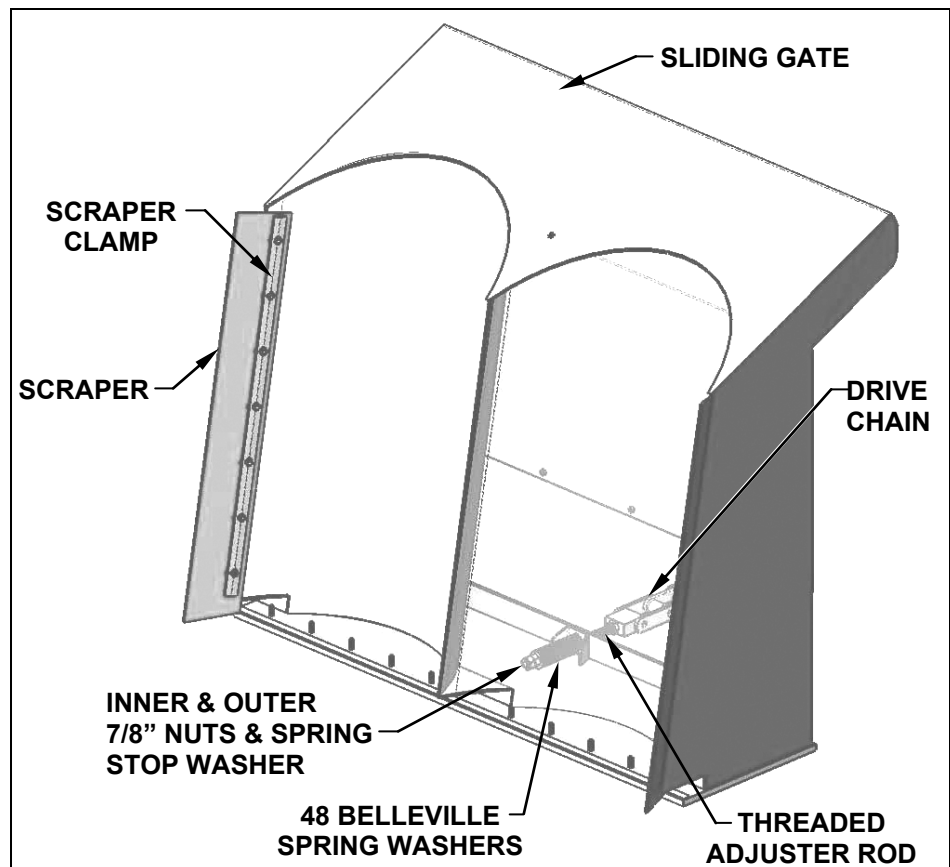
ADJUST DRIVE CHAIN & SLIDING GATE
